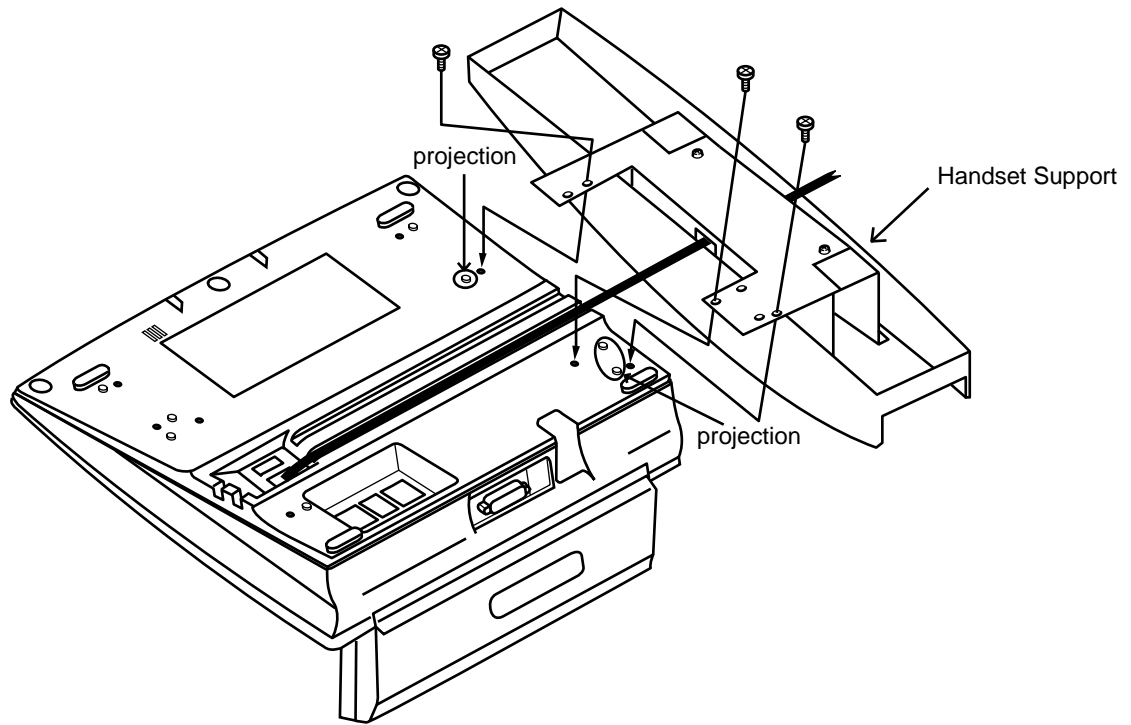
Mounting of Handset (Right Side of DESK CONSOLE) (Continued)
